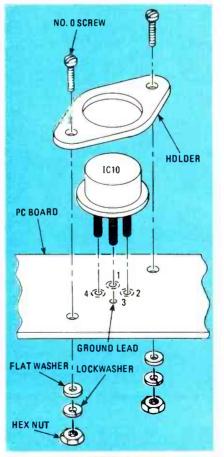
OSCILLATOR IC, IC10, can be mounted using hardware shown, or secured by soldering case to board.
